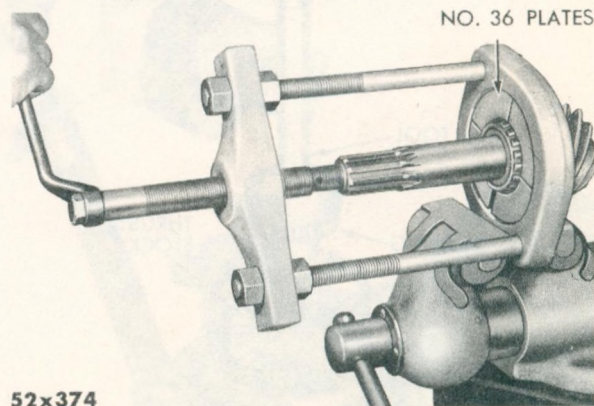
Removing Pinion Bearing From Shaft (Puller C-293-F2)
